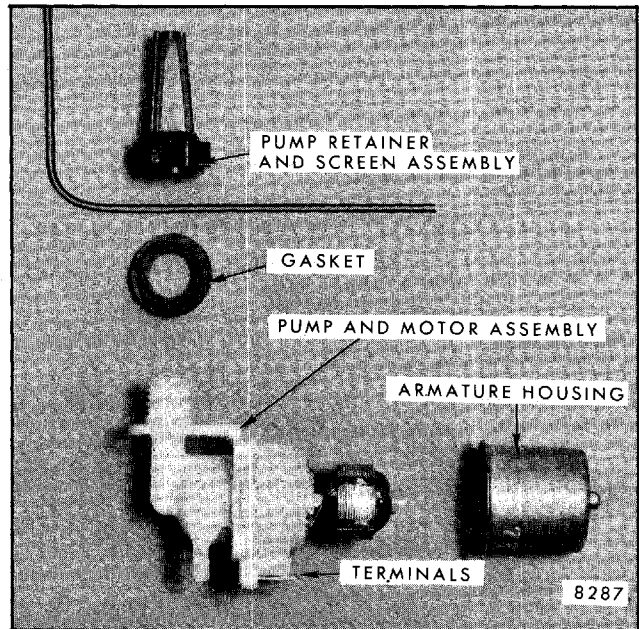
Jar Mounted Motor and Pump Assembly
